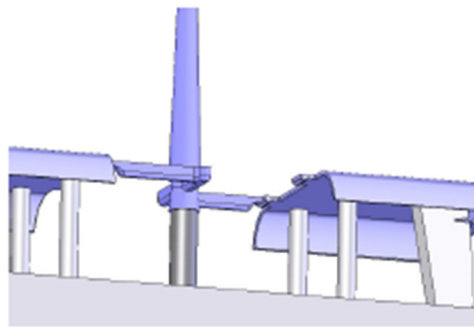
(c) Ejected Part with Sprue puller (DS, Standard Components, 2008)
